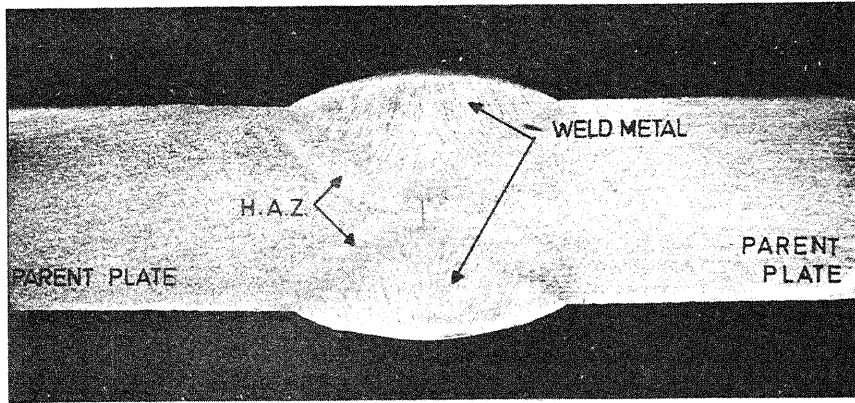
MACROGRAPH OF BUTT WELD SHOWING POSITION OF HEAT AFFECTED ZONES (x2 MAGNIFICATION).
